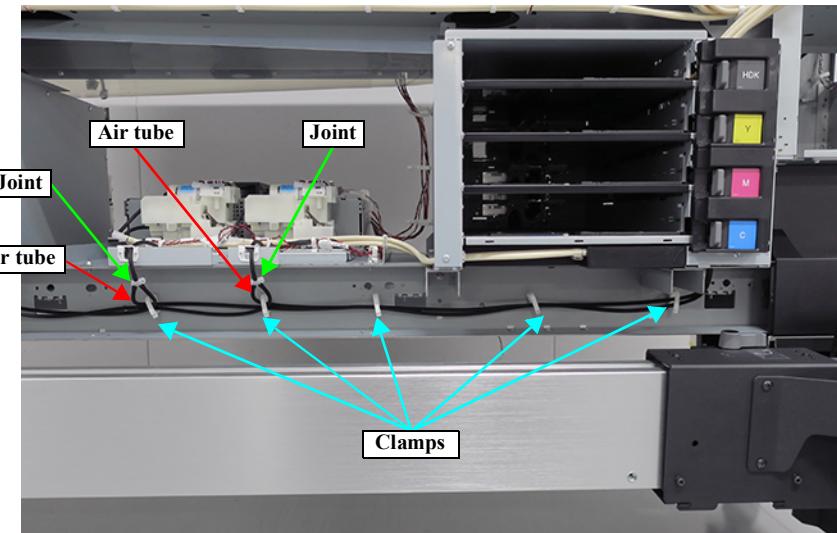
Removing the INK HOLDER RIGHT (5)
